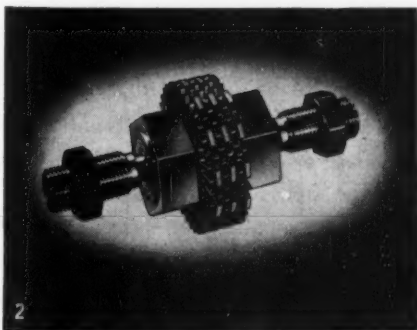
New "Type A" Wise Dresser Cutter Assembly showing alternate fine and broad tooth construction.
